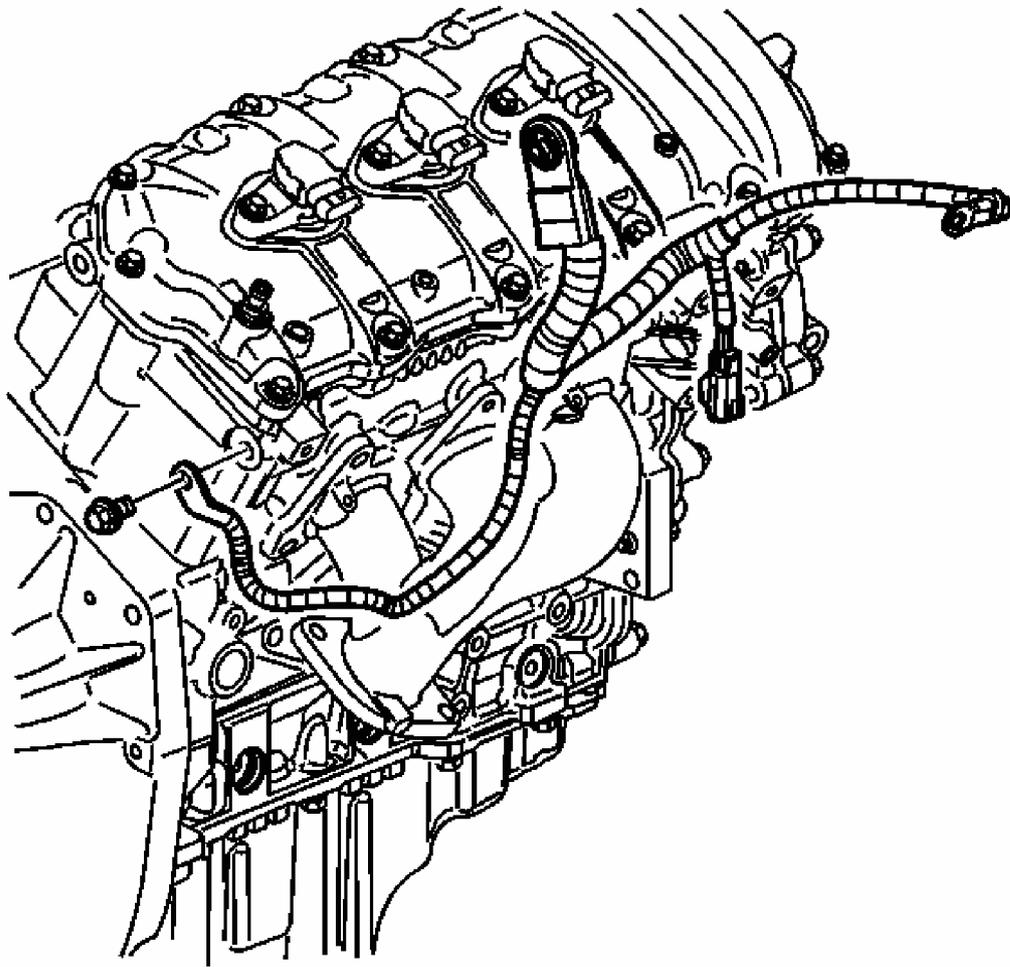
View Of Right Battery Cable Harness At Right Side Of Engine
